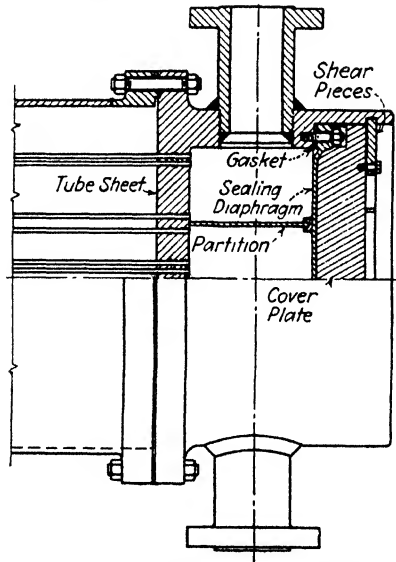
Construction details of Foster Wheeler high-pressure closed heater.
